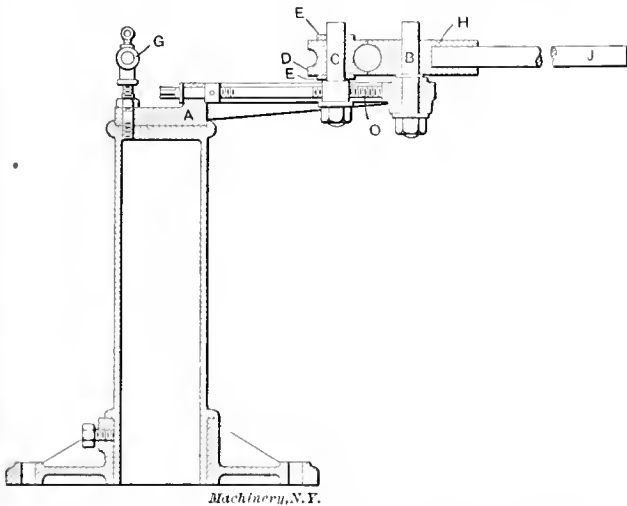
Vertical Section of Monnet & Moyne Tube Bending Machine.
